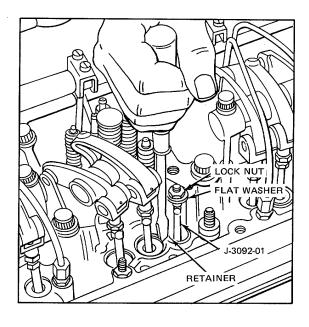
Removing Push Rod from Upper Side of Cylinder Head
